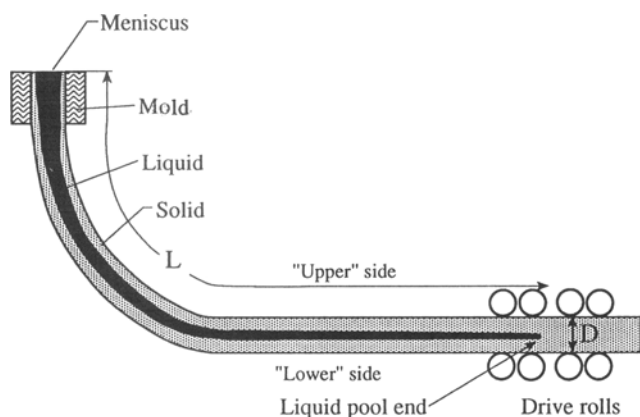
Schematic illustration of the continuous casting equipment used. The secondary cooling is divided into four or five zones in the two machines. L is the liquid pool length. The drive rolls are also shown.
